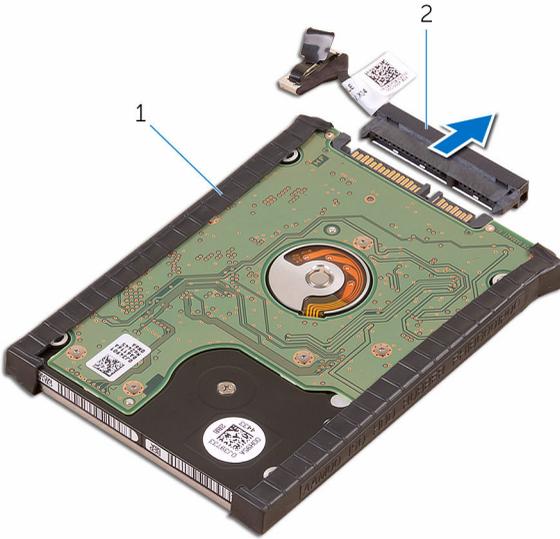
Disconnecting the hard-drive interposer from the hard-drive assembly
